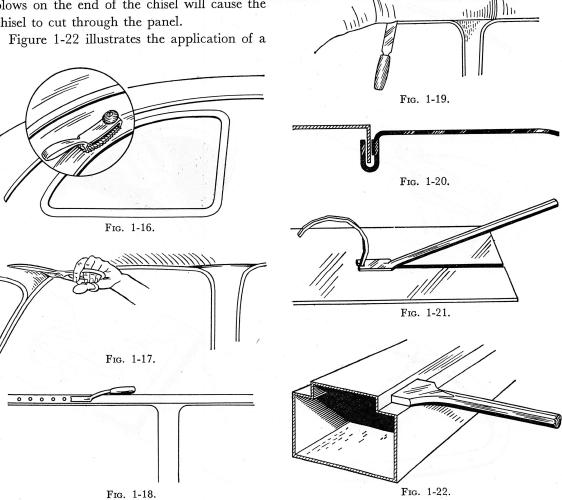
illustrates a flange tool used to open or spread flanges.
